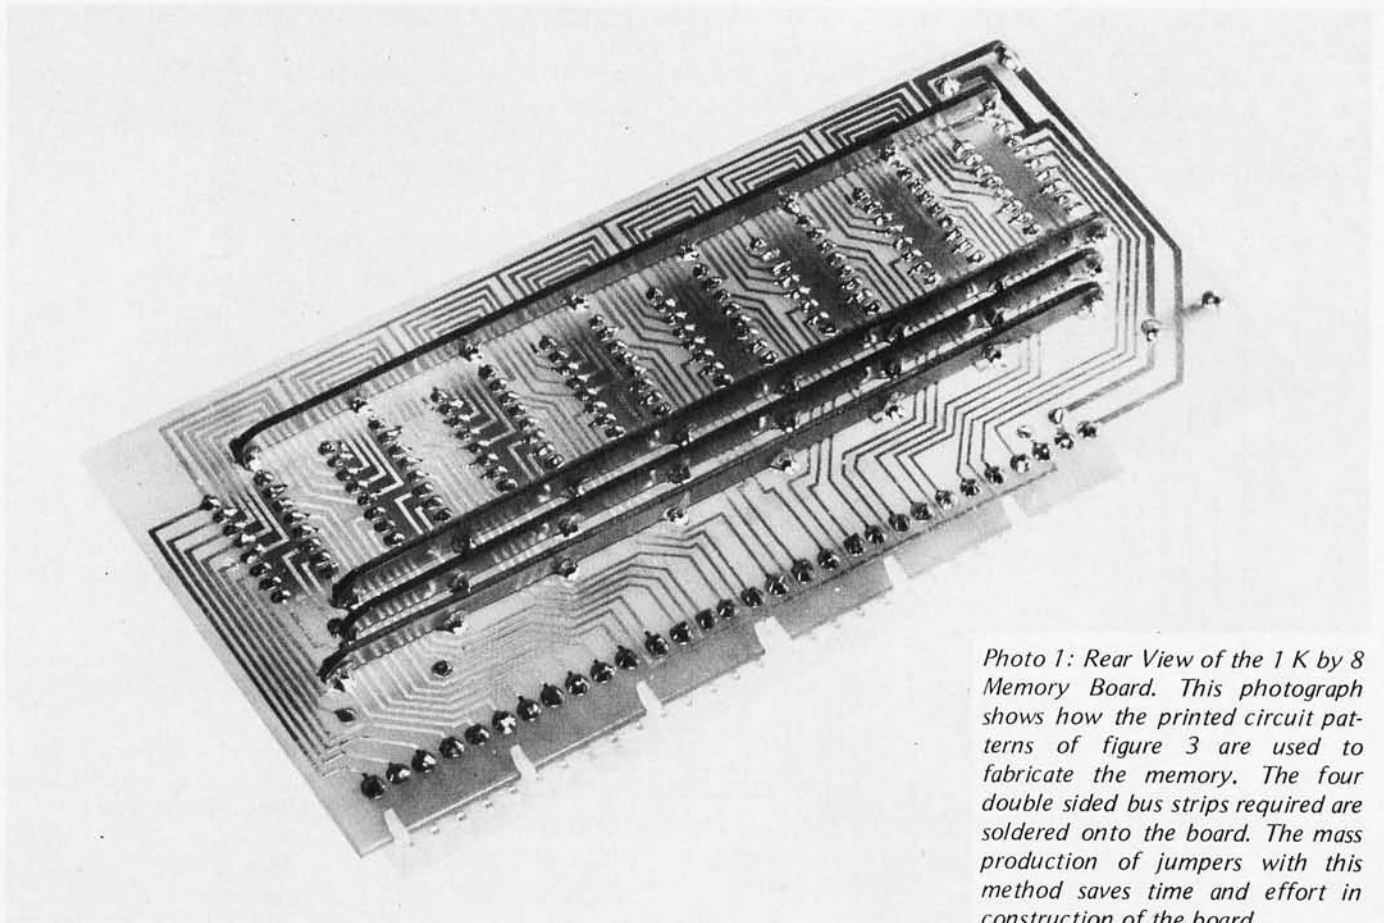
Rear View of the 1 K by 8 Memory Board. This photograph shows how the printed circuit patterns of figure 3 are used to fabricate the memory. The four double sided bus strips required are soldered onto the board. The mass production of jumpers with this method saves time and effort in construction of the board.
